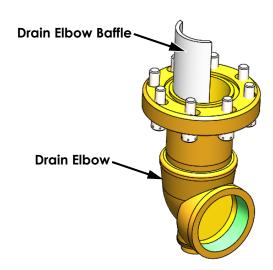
Gearcase Drain Elbow Assembly (P/N: DT17422)
